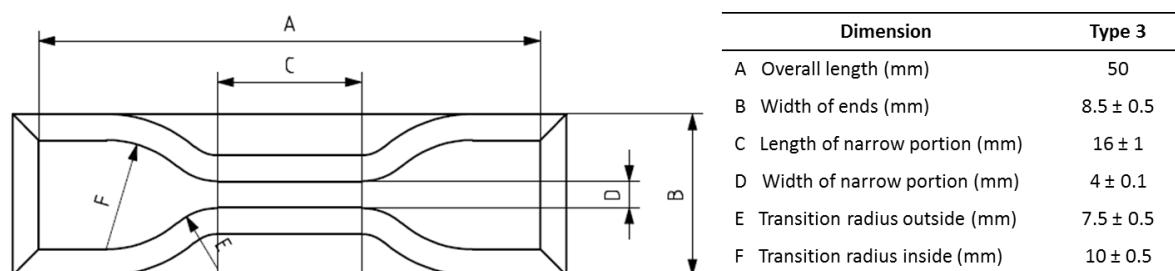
Dimension of the cutting die used for the dumb-bell test piece Type 3. The dumb-bell test piece dimensions correspond to A, C, D and F.
